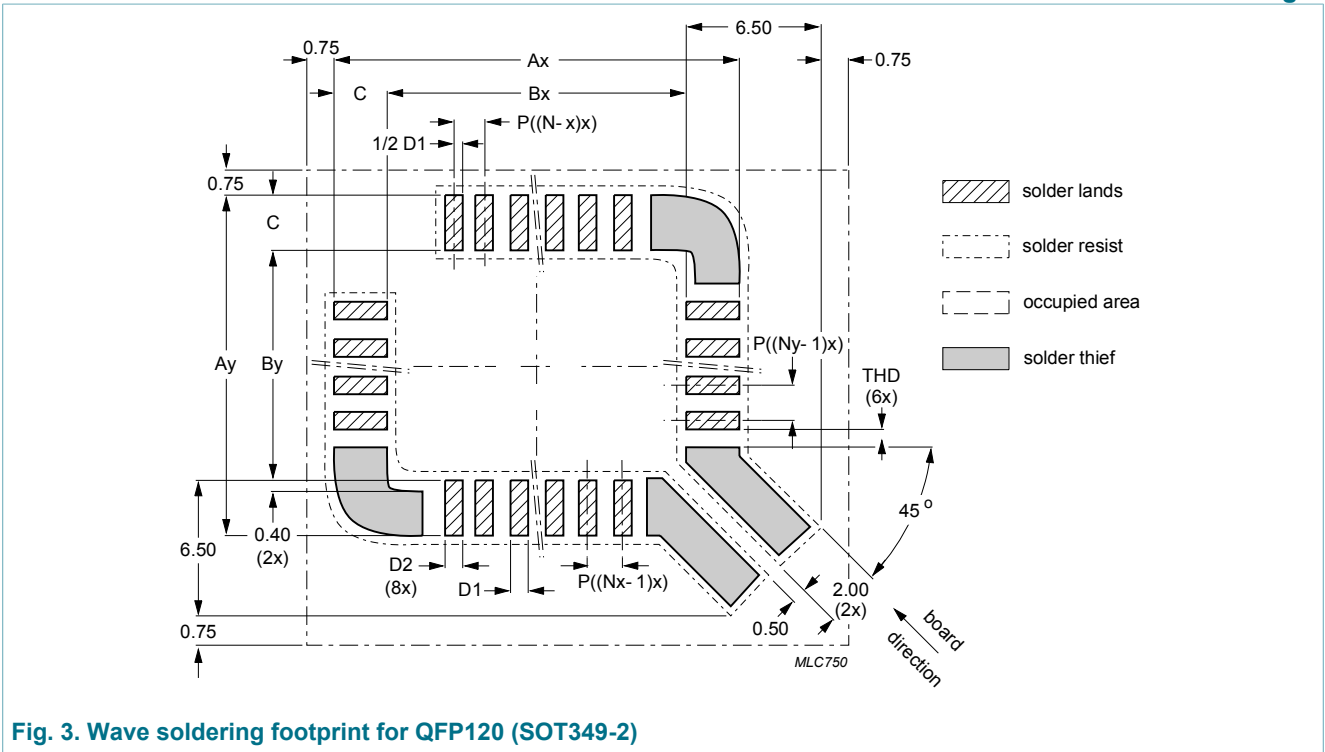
Wave soldering footprint for QFP120 (SOT349-2)
